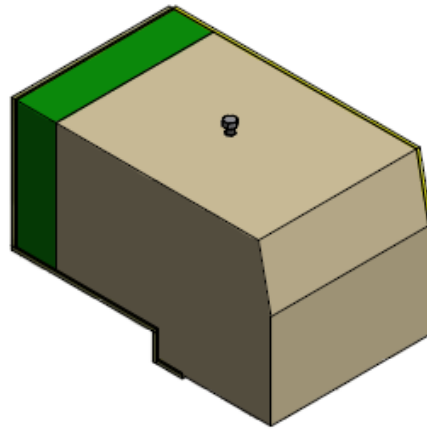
3D Rendering of Newly Designed Precast Curb – Furnace No. 12
